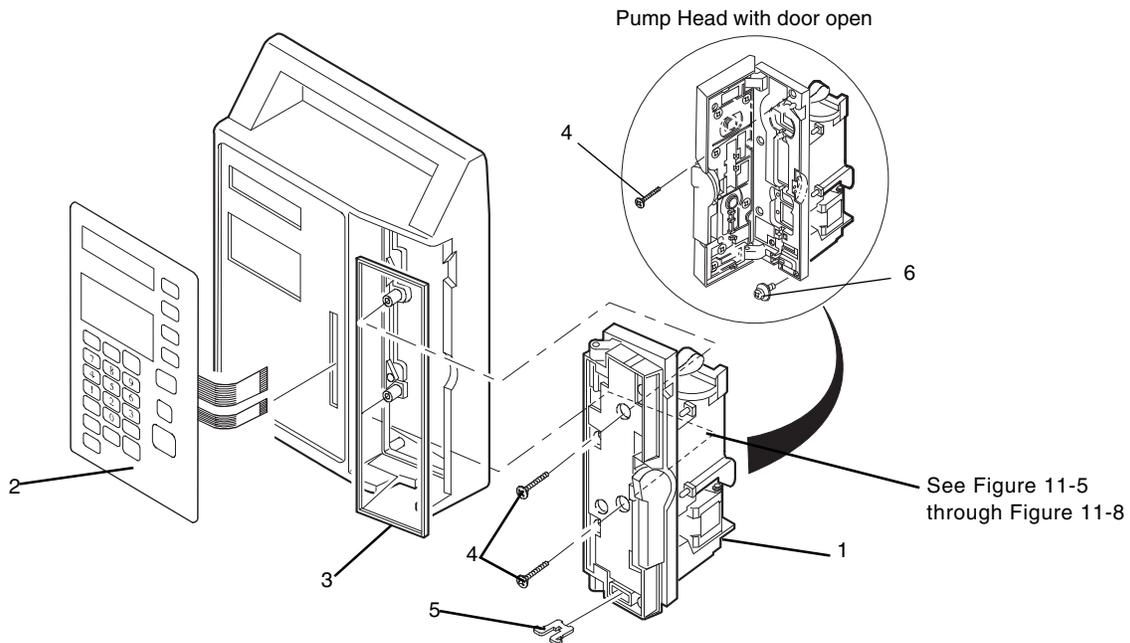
Front Housing Assembly (F049990010) - Front View
